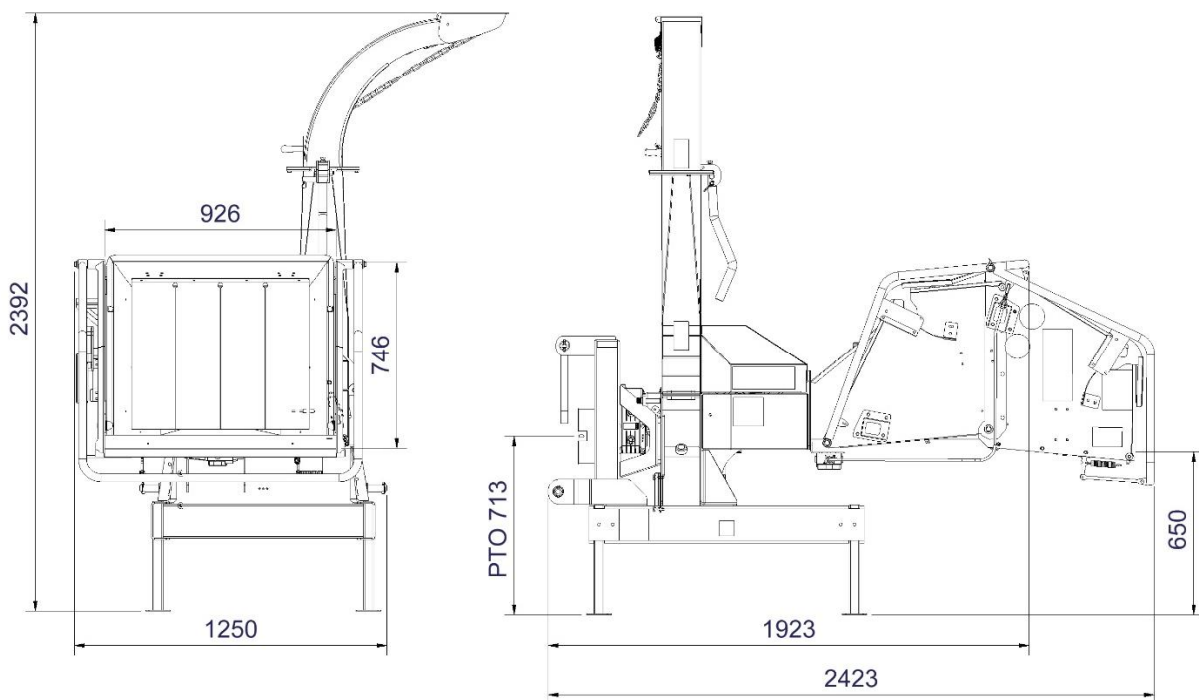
Dimensional drawing for TP 130 PTO with foldable funnel
